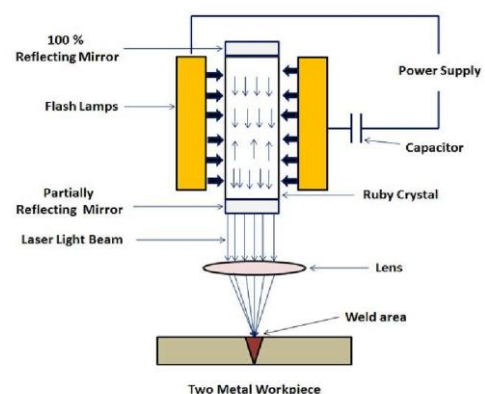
Laser Beam Welding vs Plasma Arc Welding.
